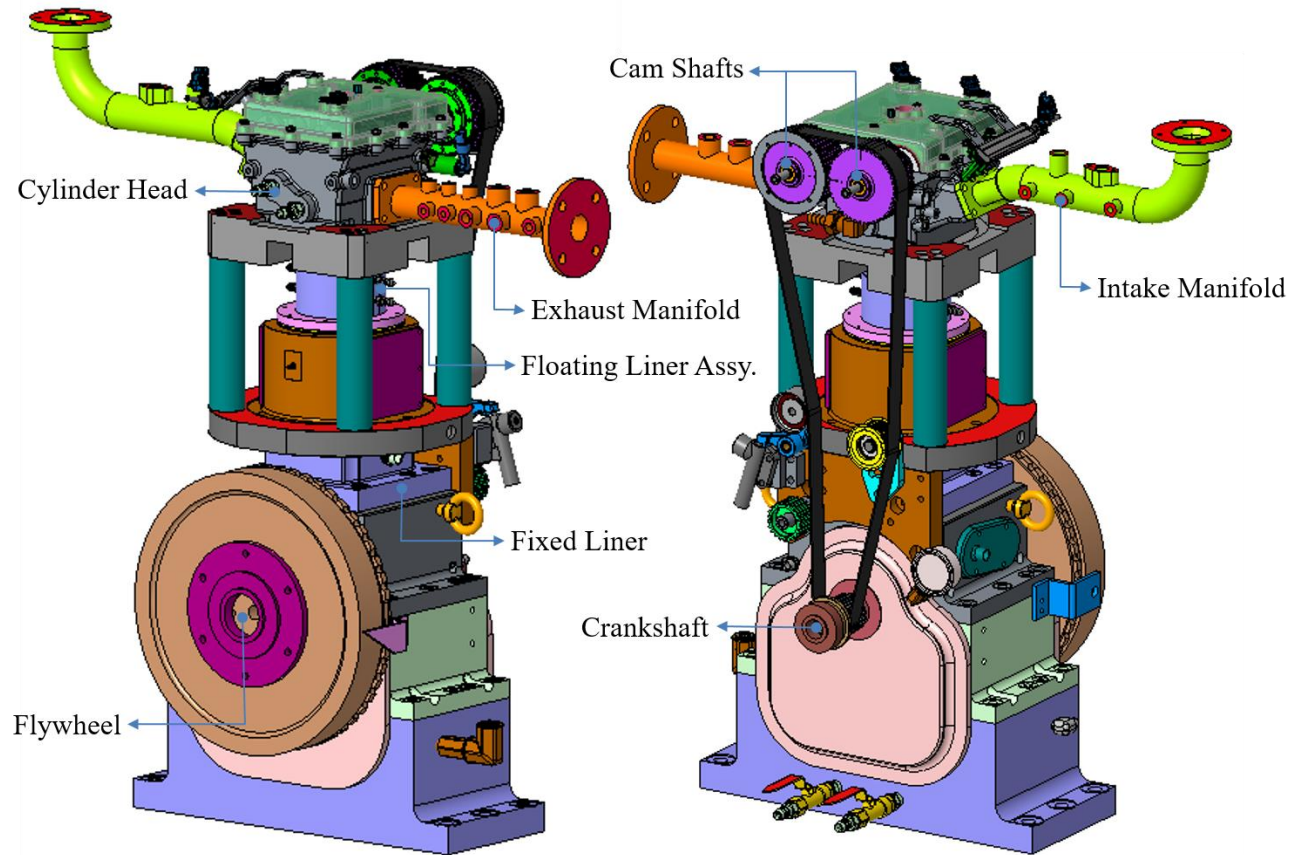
Engine V2 (L – Engine rear view, R – Engine front view)
